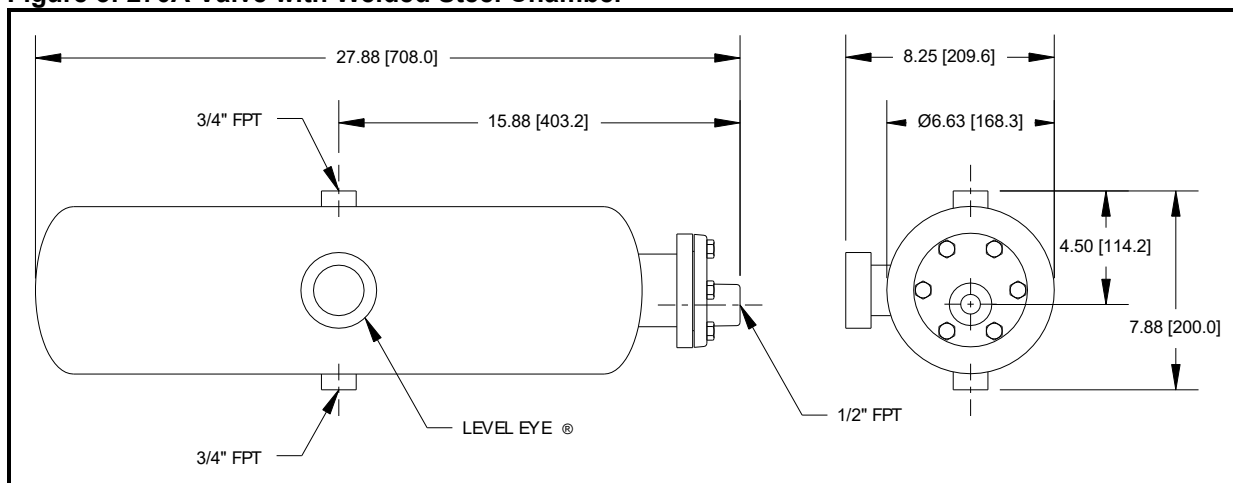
270A Valve with Welded Steel Chamber
